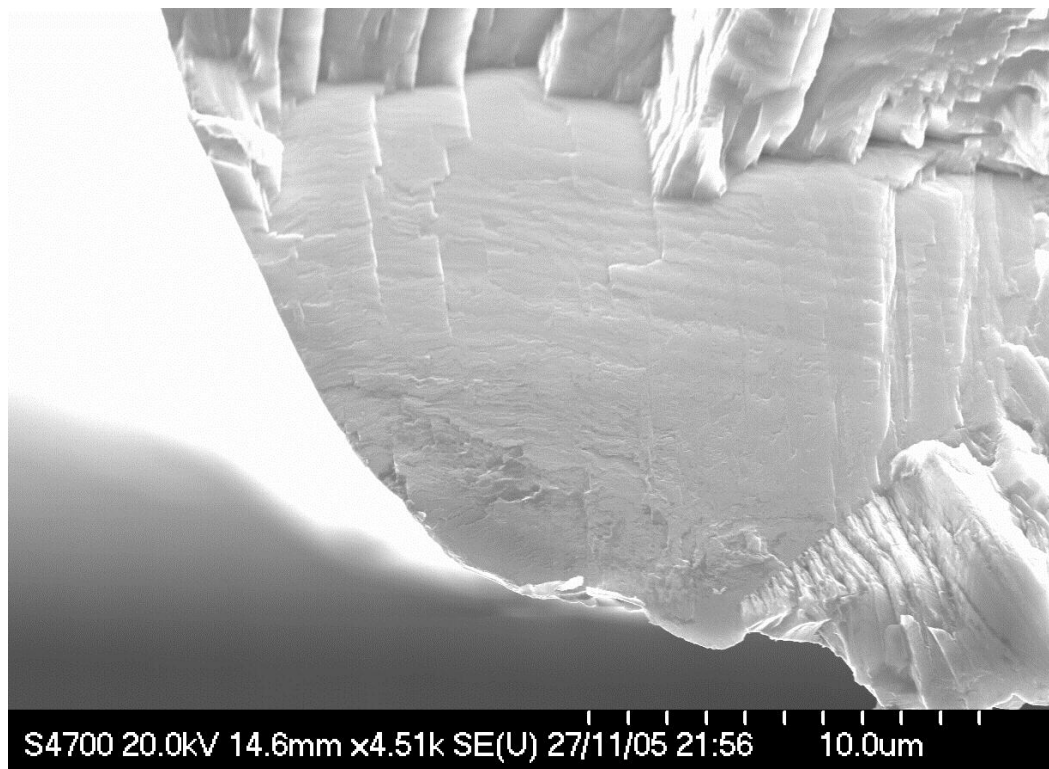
Higher magnification image of cleavage-like fracture surface with additional discontinuous crack morphology formed as the crack jumped from slip plane to slip plane. 150 μm specimen.
